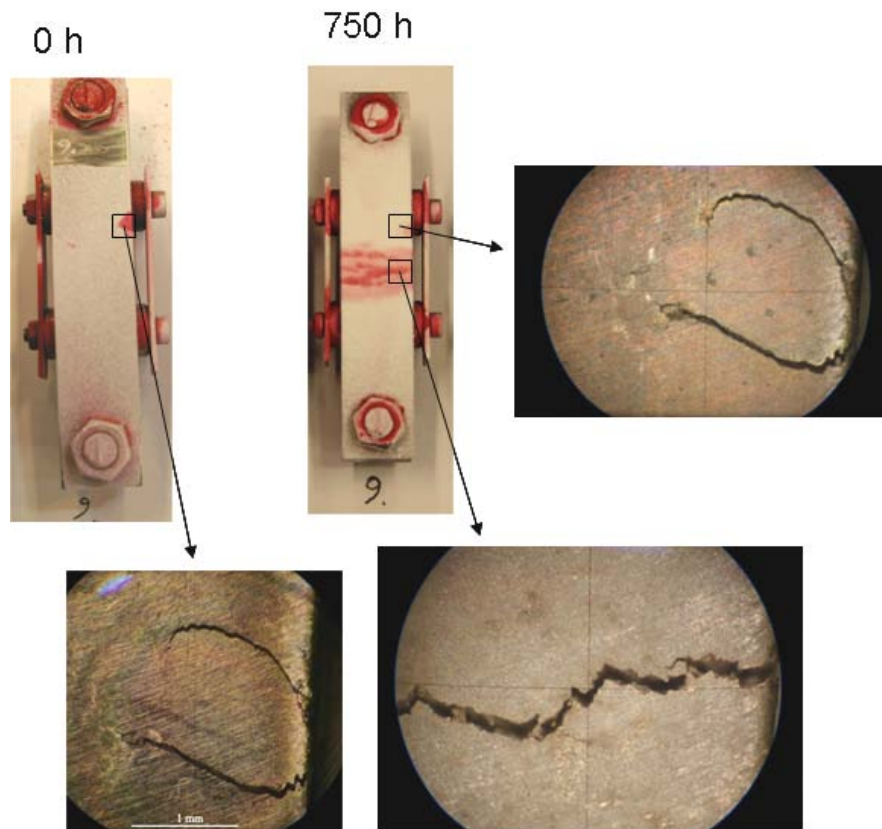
Pure Alloy 82 specimen (specimen No. 9) prior to the exposure and after 750 h exposure to the doped steam. The weld defect opened when the specimen was loaded does not grow further in doped steam and the final fracture takes place in the middle of the specimen without any connection to the weld defect.
